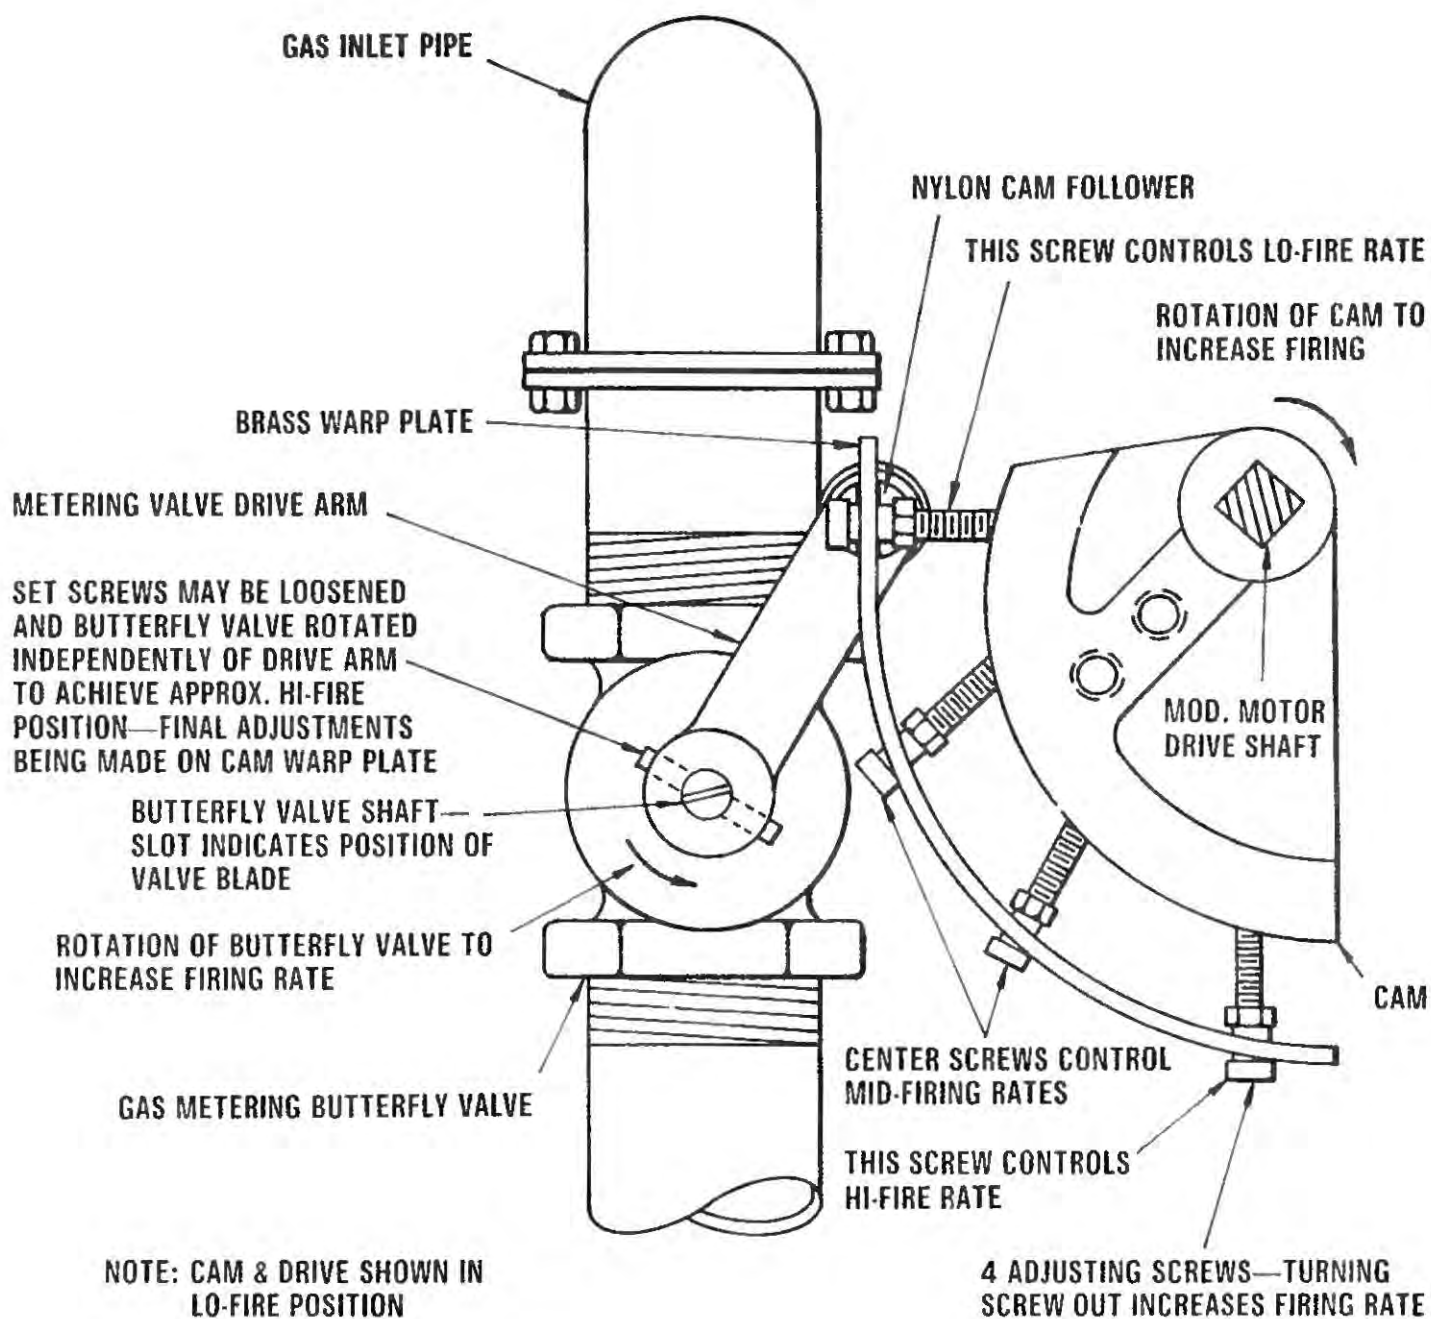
GAS METERING VALVE DRIVE ADJUSTMENTS 500-750 HP.
